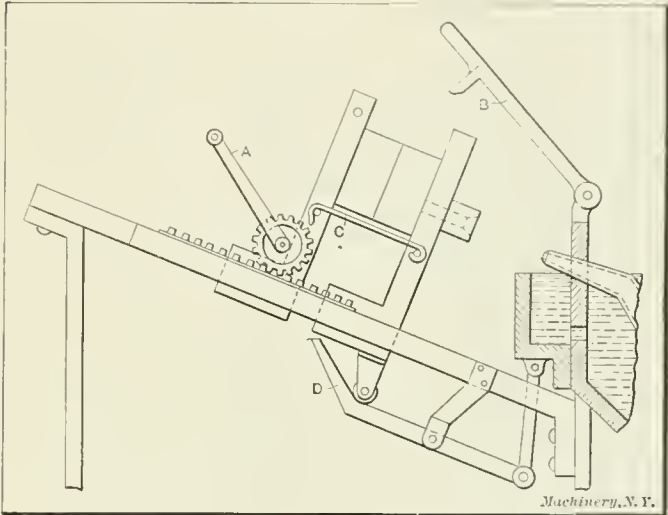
Rack and Pinion used to part the Mold and draw it away from the Spout
